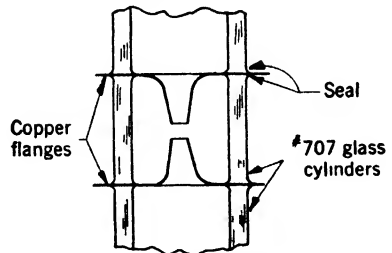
First stage in assembling cell-type TR tube. Glass cylinders are sealed simultaneously to both sides of the flanges
